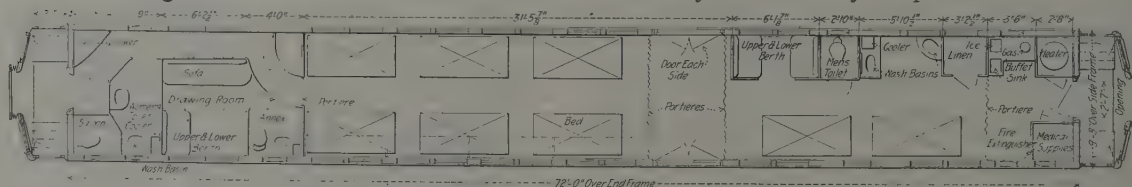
A—Floor Plan of Canadian Government Railways 72-ft. Military Hospital Car.
